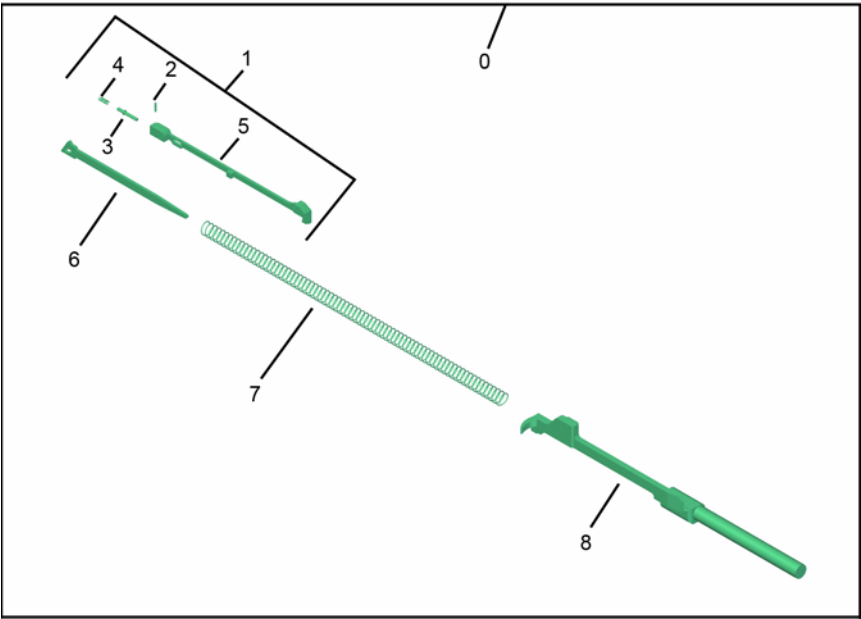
MK 14 MOD 0/1 Operating Rod and Connector Assembly.
